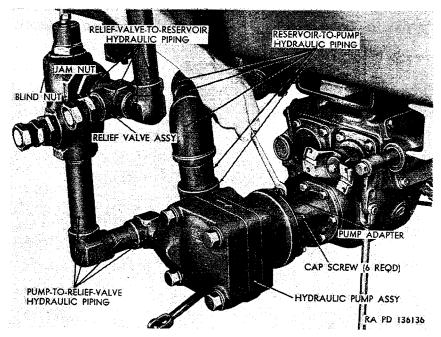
Removing hydraulic pump and relief valve assembly from power divider M62.
